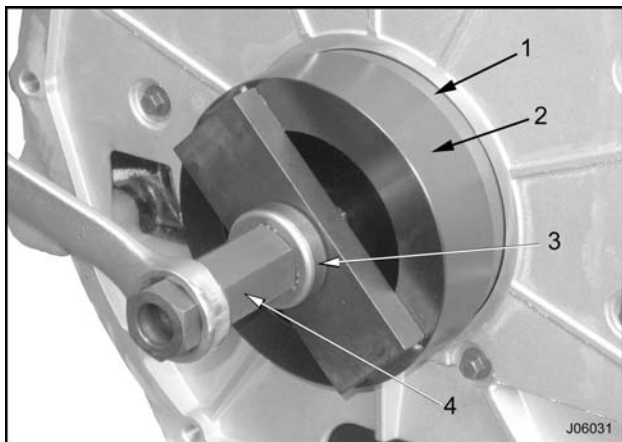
Installing the rear main seal / wear sleeve onto crankshaft
